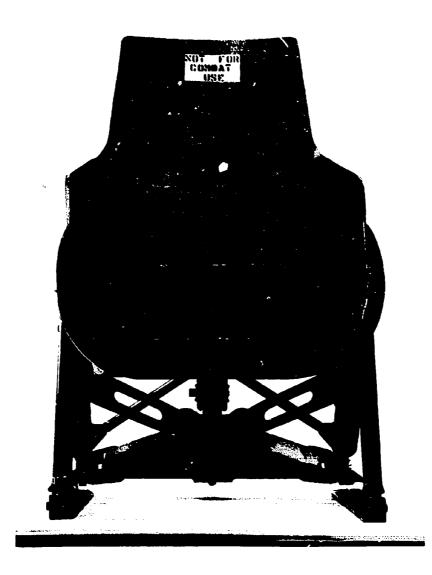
Prototype helicopter seat of dual-hardness steel (front view) that was cold-formed, welded, then heat-treated. Material was 0.305-inch-thick plate of Composite 9-10. X1/6.
